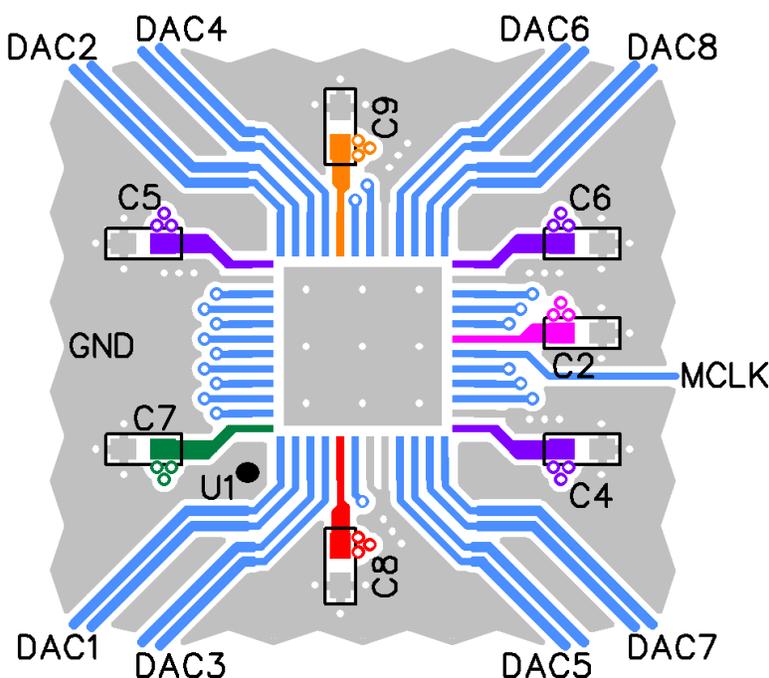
ES9017 Recommended PCB Layout Guidelines
